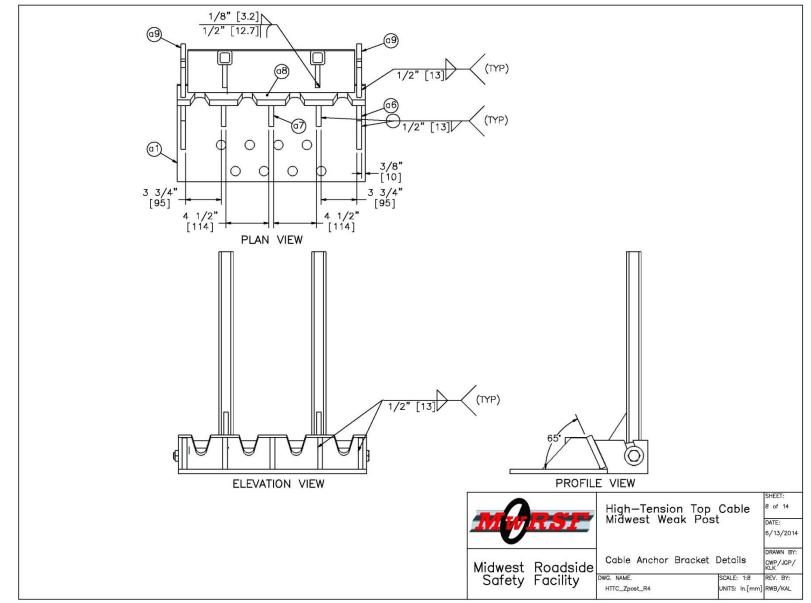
Cable Anchor Bracket Details, Test No. HTTC-2
